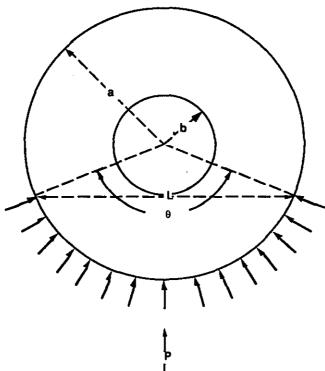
Geometry and Loading For Central Washer Sizing
